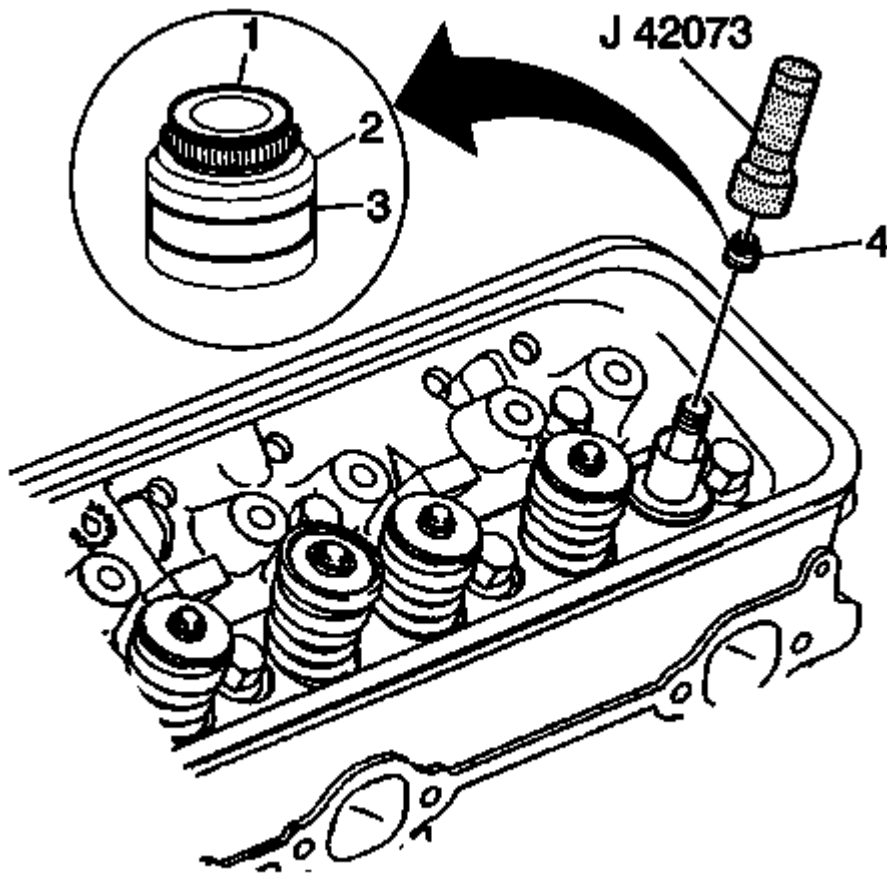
Identifying Intake & Exhaust Valve Oil Stem Seals
